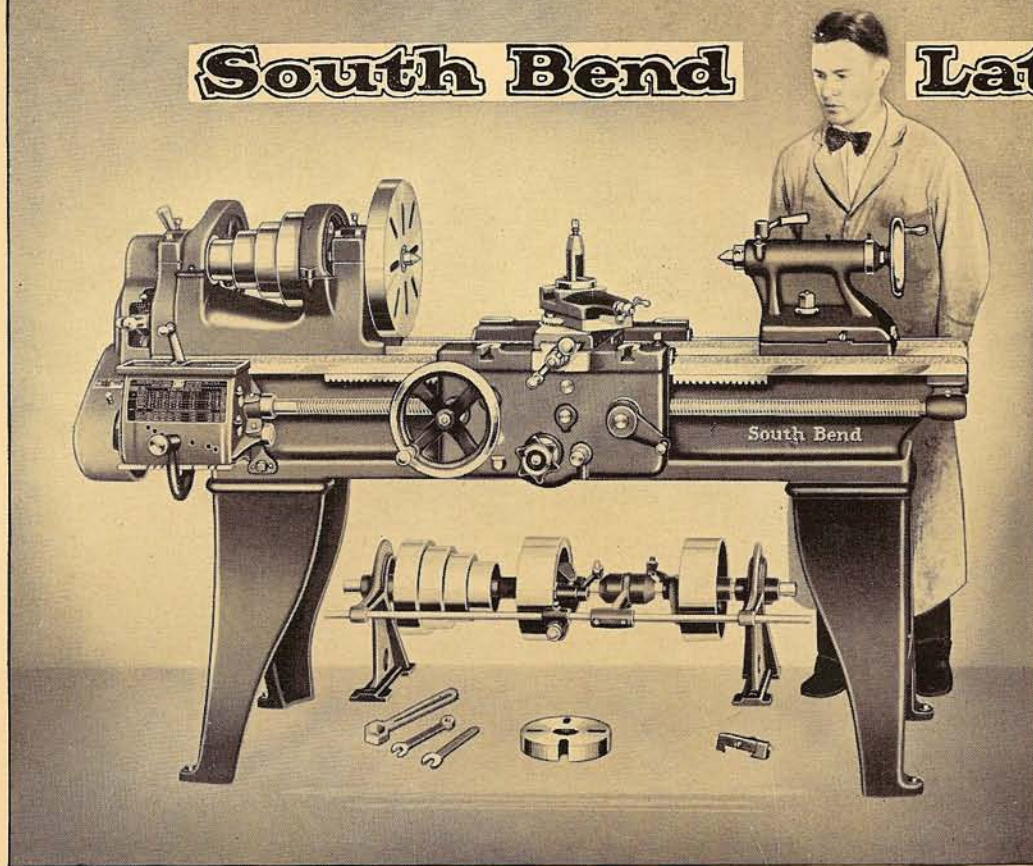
Cat. No. 17-C, 16' x 6' Quick Change Gear Countershaft Driven South Bend Precision Lathe \$722.00
